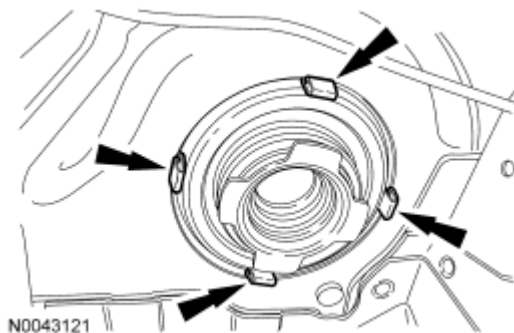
Locating Steering Column Shaft-To-Dash Seal
